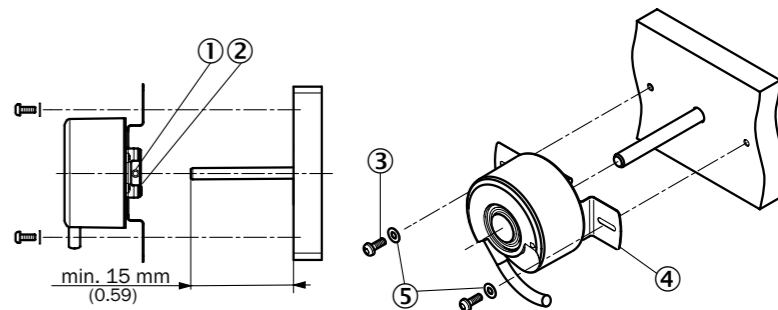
Mounting of DBS60 Core through hollow shaft with stator coupling (clamping at the rear)
